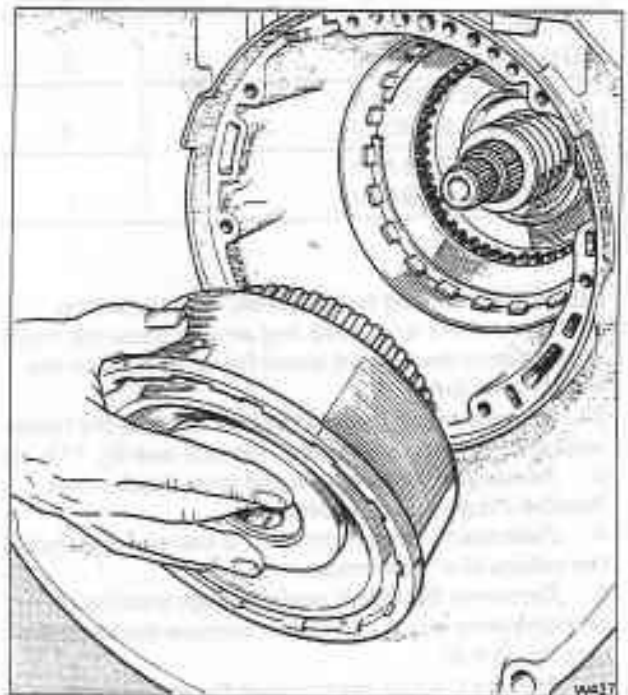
Removing the direct clutch and intermediate sprag assembly
